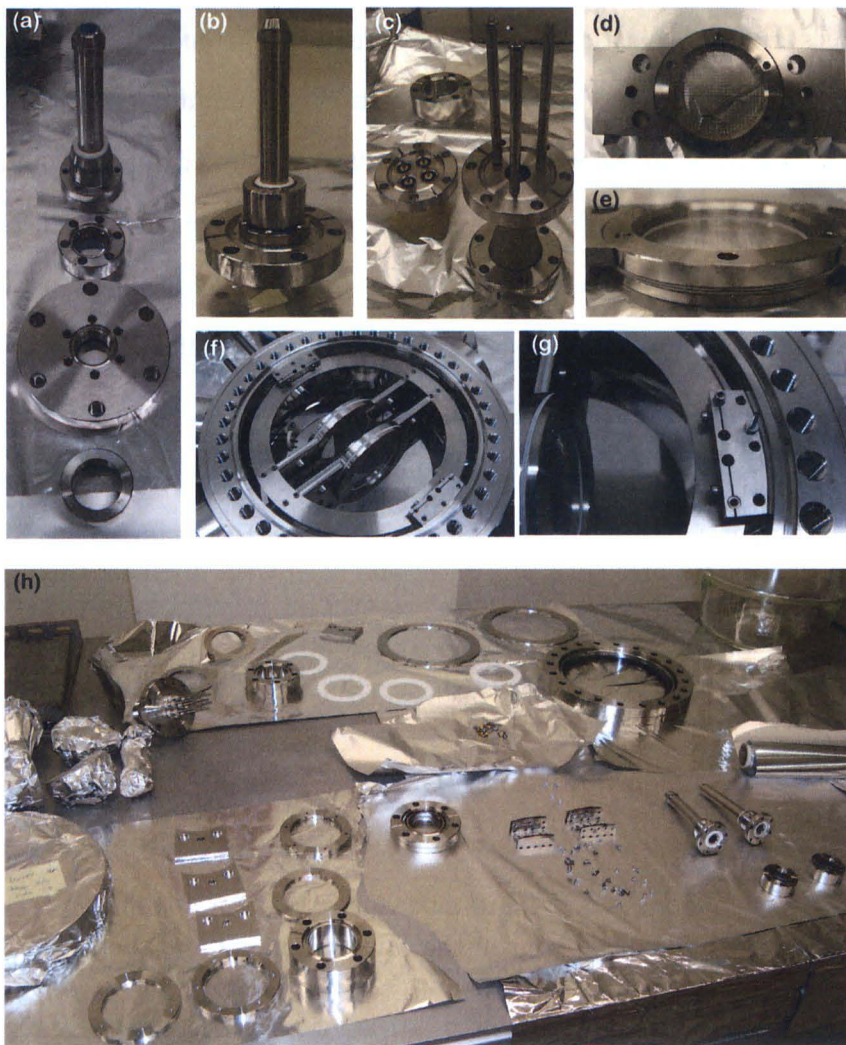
Cleaning of all components of the chamber: (a) mounting for the aspheric lens separated into pieces and (b) the lens mounting assembled, (c) the mounting for MCP taken into pieces, (d-g) mounting for the ionizing grid, (h) all components separated and prepared for cleaning.
